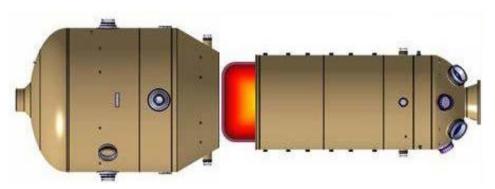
Separation of steam dome and lower assembly housing tube bundle.
